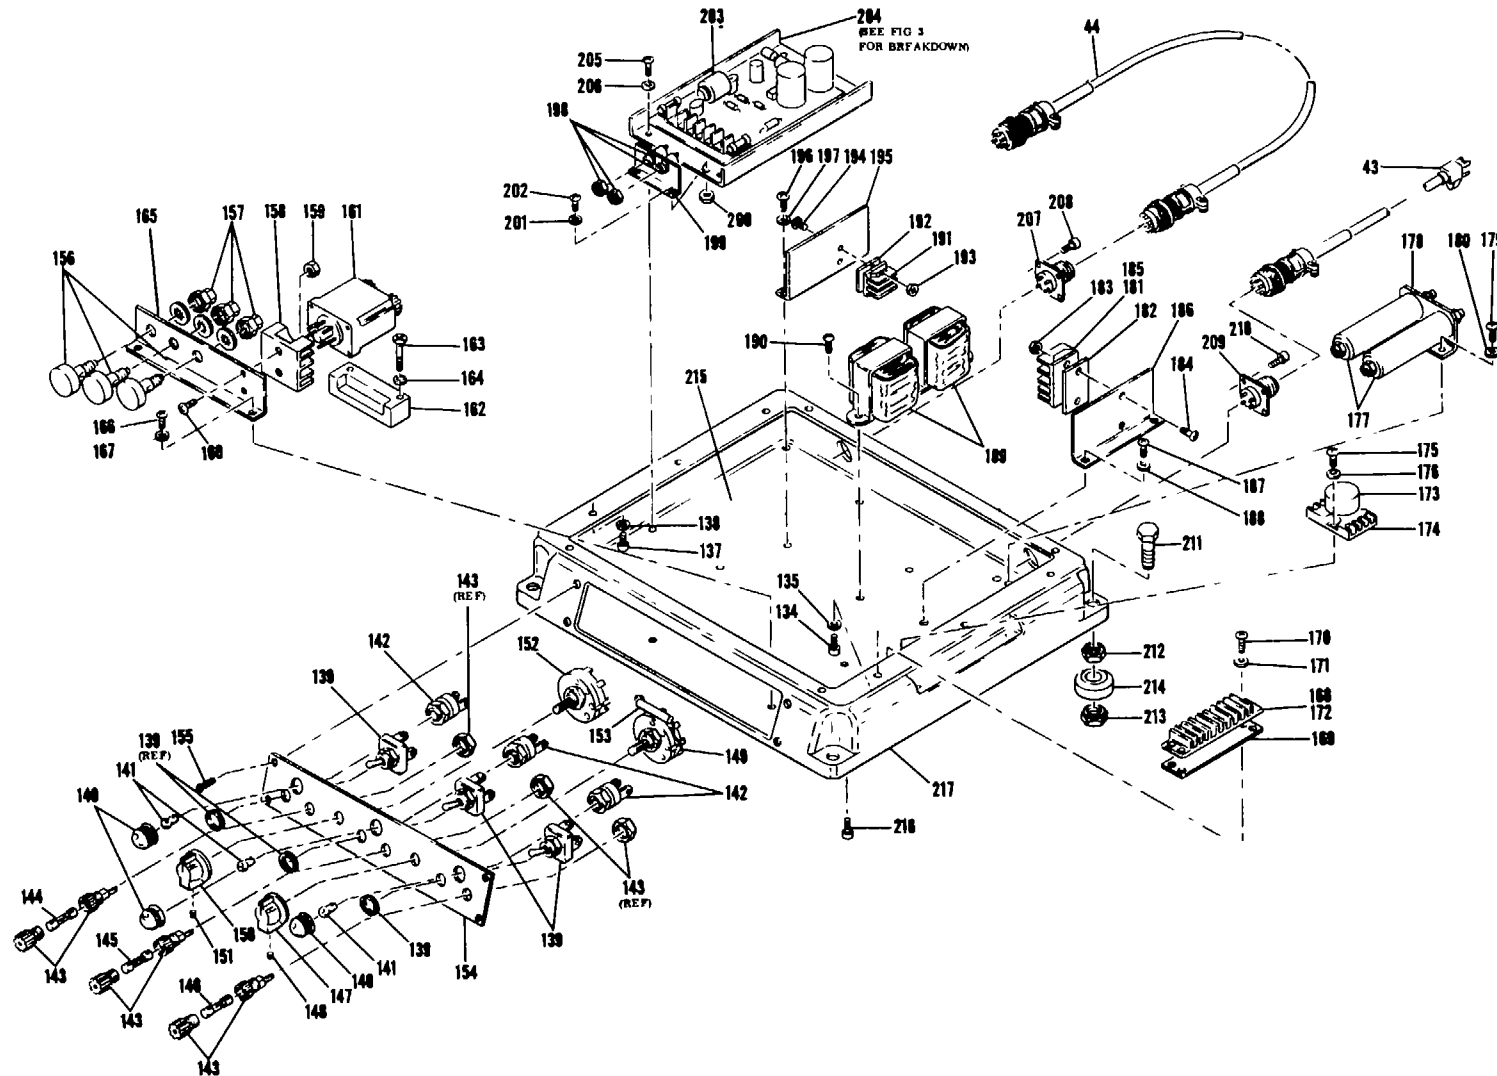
Gyro Tester, Indicator Assembly (Sheet 3 of 3)
